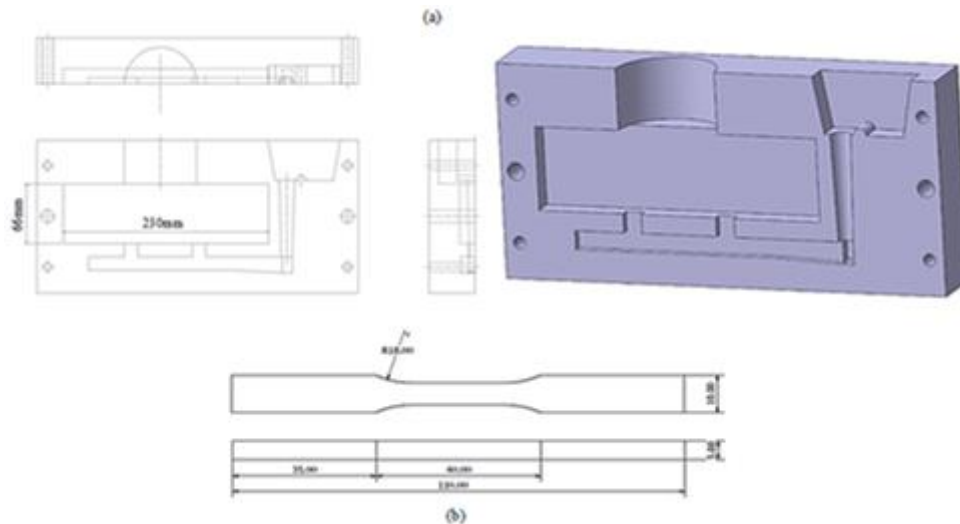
Drawing presentation of (a) cast iron mould and (b) dimensions of tensile sample
